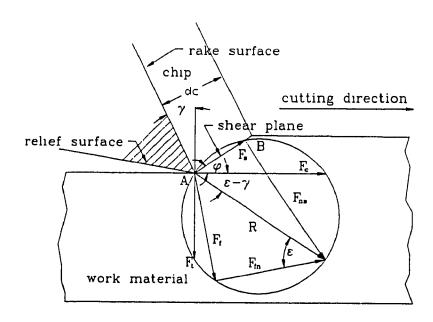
Schematic diagram of cutting forces during metal cutting when a shear plane is formed [27].
